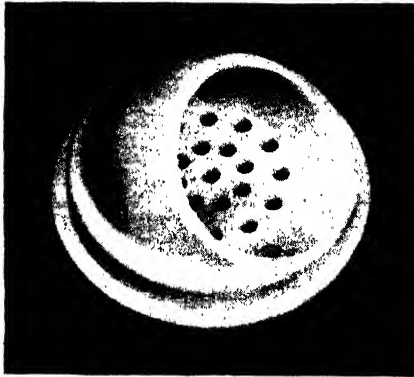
Telephone mouthpiece. It is necessary to use a side core, which is withdrawn before the molding can be ejected from the mold.
